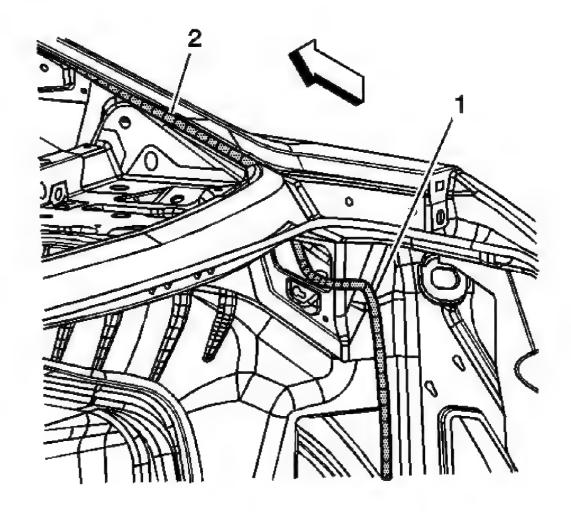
Identifying Rear Upper Drain Hoses Courtesy of GENERAL MOTORS CORP.
